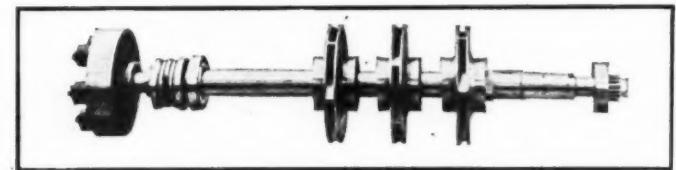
The shaft and centrifugating wheels of the Sulzer pump
